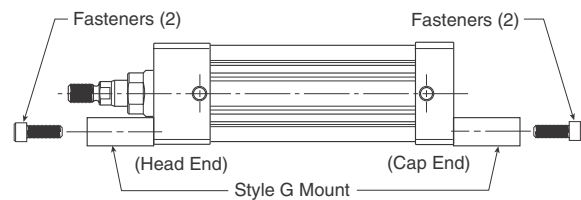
Side End Lug Mounting Kit - Style MS7
